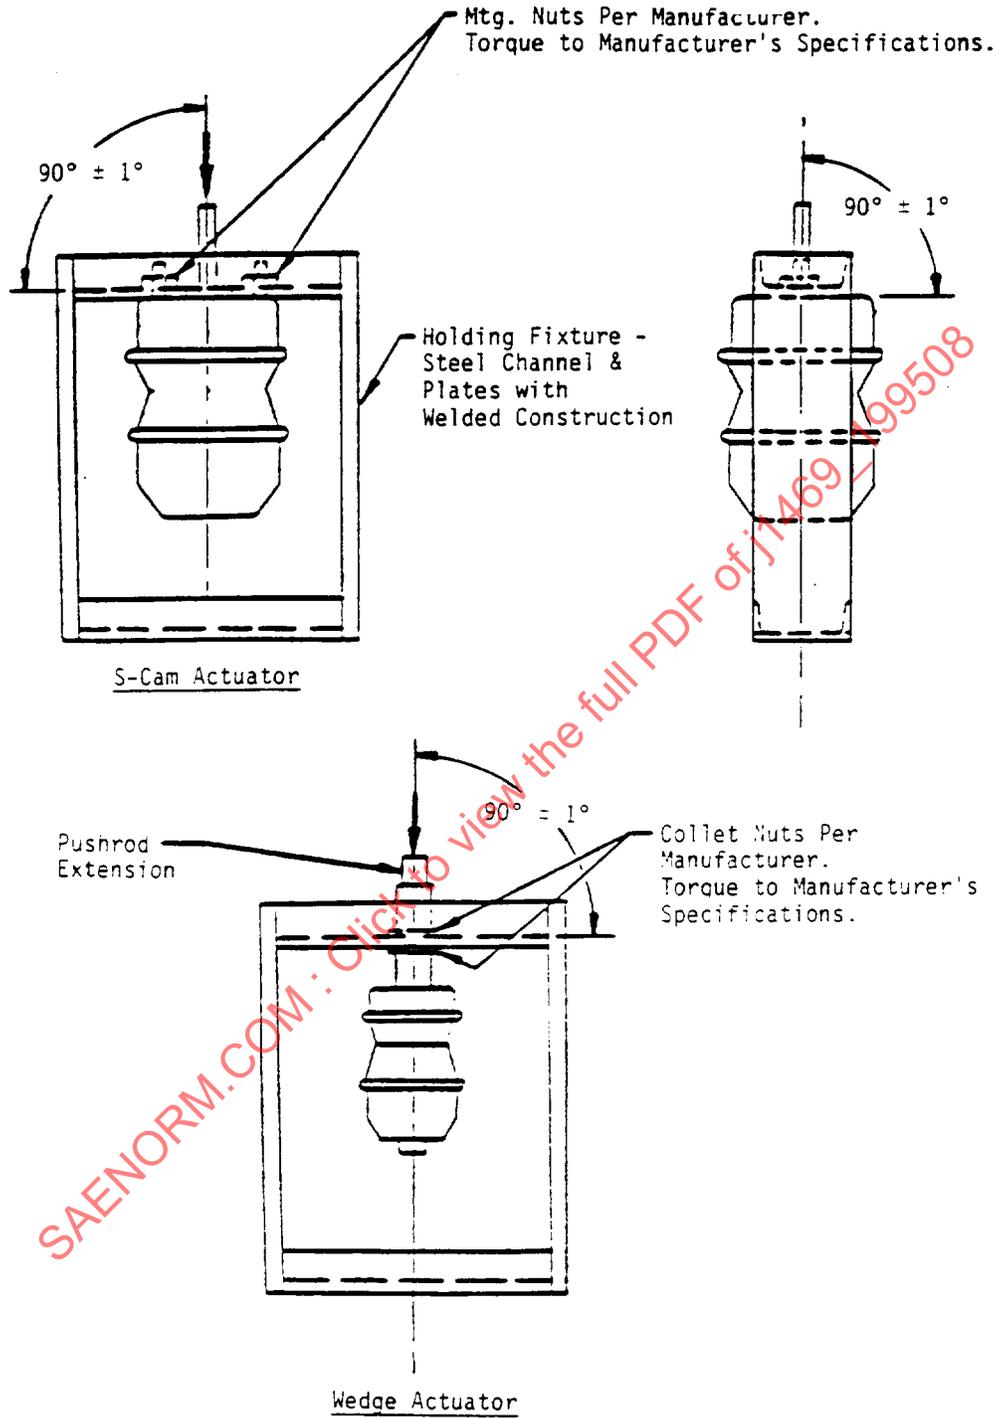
MOUNT UNIT TO TEST FIXTURE
